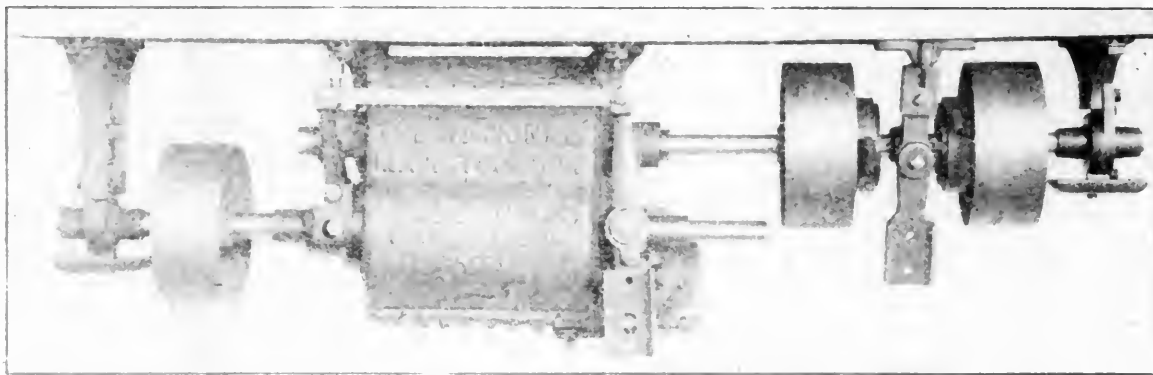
EXTERIOR VIEW OF THE SPEED "VARIATOR," AS EQUIPPED WITH REVERSING CLUTCHES FOR LATHE DRIVING.
